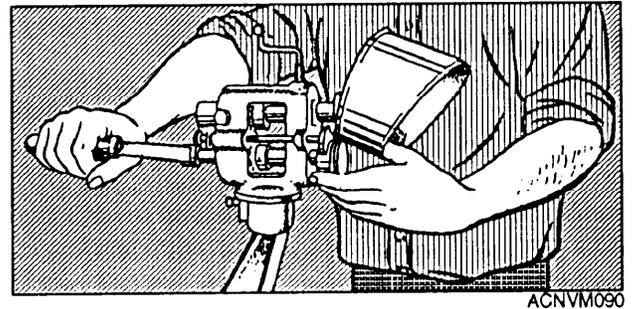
Elbow edging rolls for combination rotary machine.
